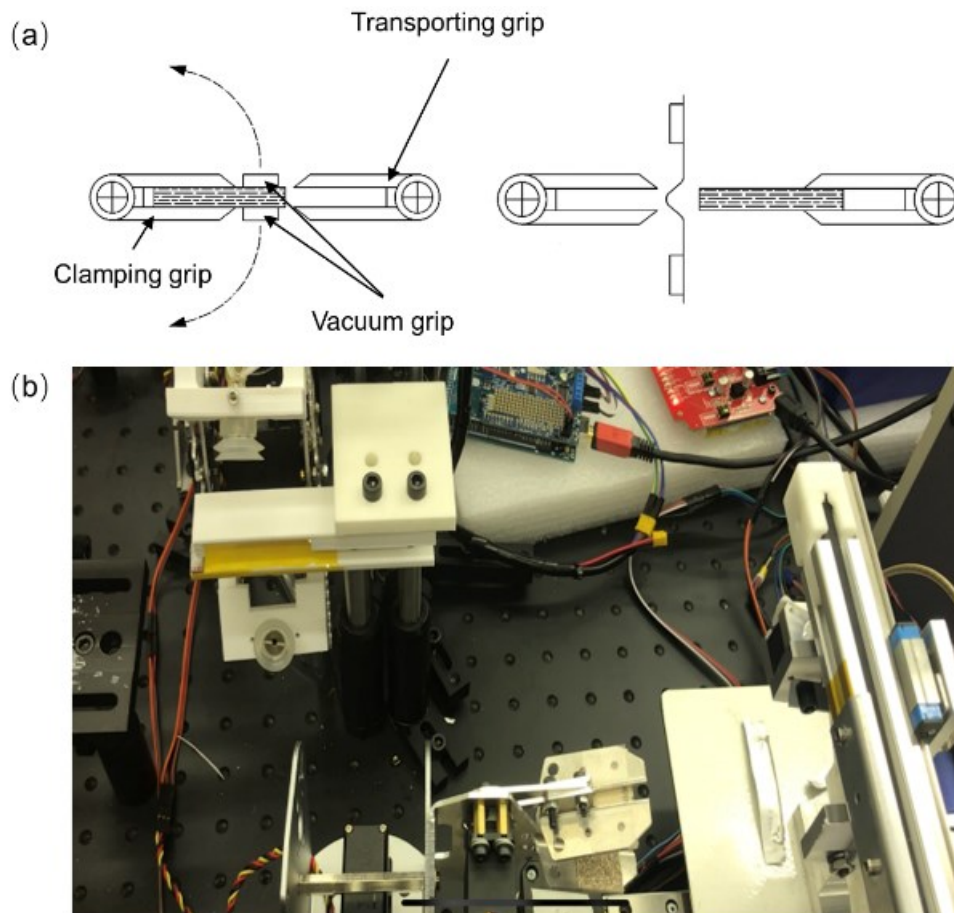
8 (a) Schematic and (b) Prototype of the pouch removal module.
